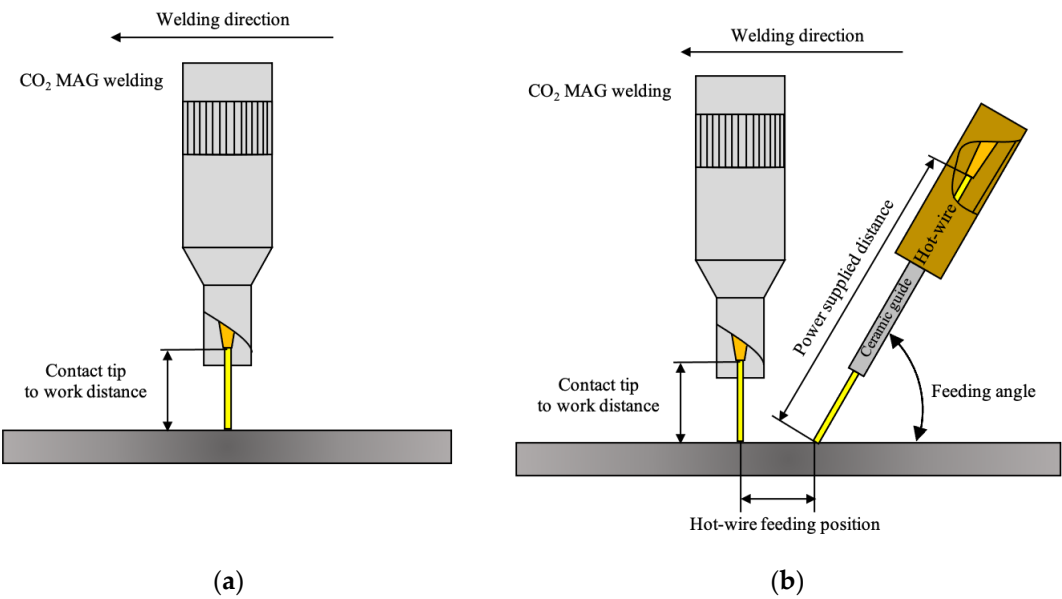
Welding experimental setups: (a) schematic of solo GMAW and (b) schematic of hot-wire GMAW.
